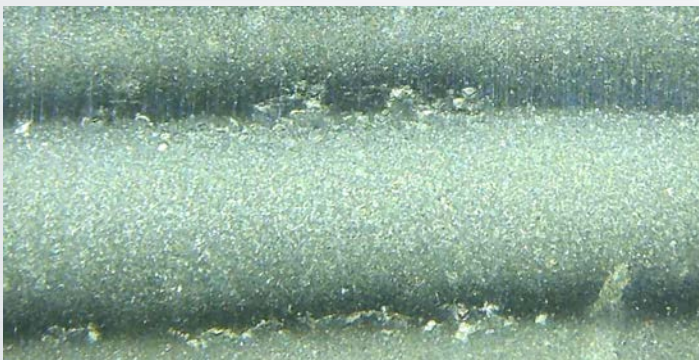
Bearing D8 inner ring raceway augmented view with Current Leakage and cratering damage
